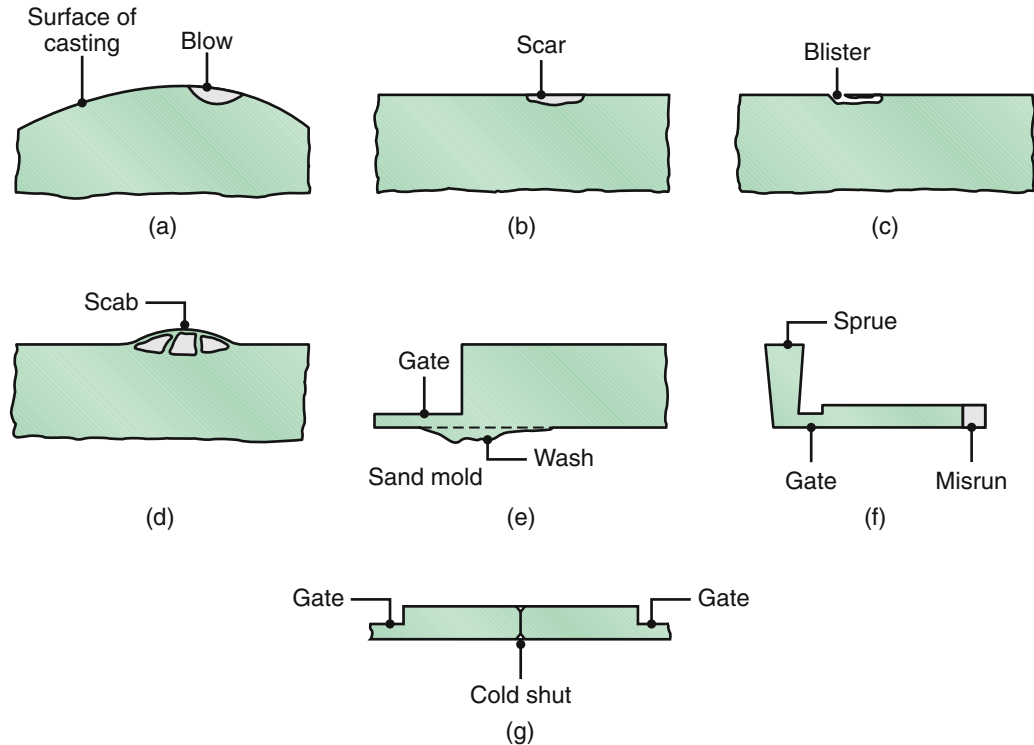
Examples of common defects in castings. These defects can be minimized or eliminated by proper design and preparation of molds and control of pouring procedures. *Source:* After J. Datsko.
